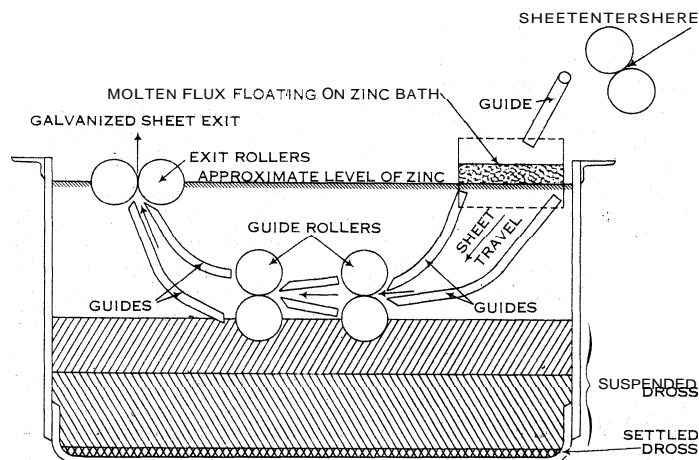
SCHEMATIC DRAWING OF SHEET GALVANIZING BATH, HOT-DIP PROCESS
